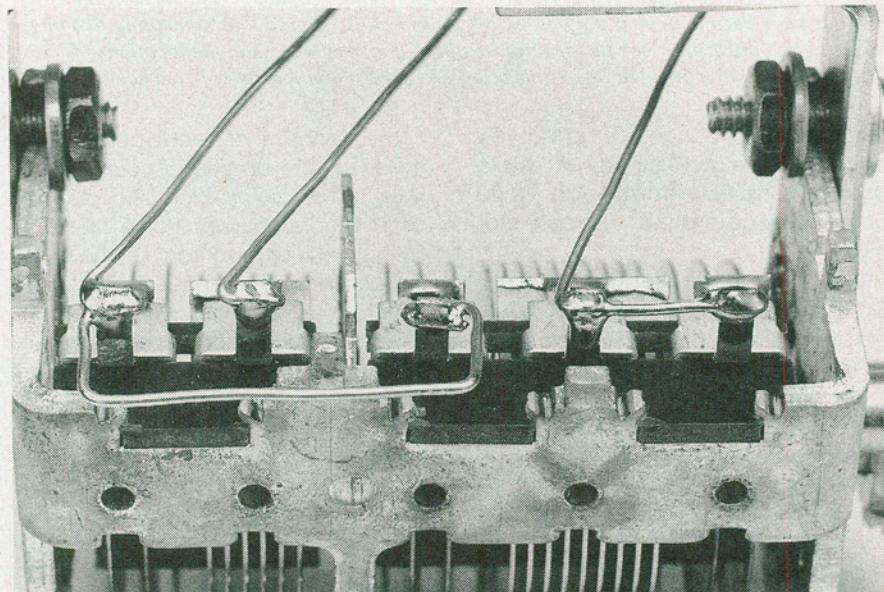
The lugs on the variable capacitor must be wired and soldered before the unit is attached to the baseboard. Number the lugs in your mind (lug 1 on the far left and lug 5 on the far right), and then run sections of bare wire from lug 5 to lug 4, lug 3 to lug 1, and another piece from lug 2.
